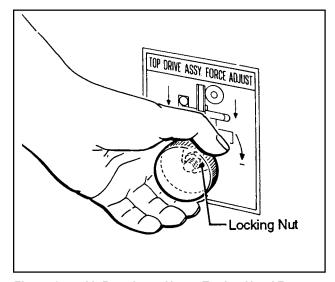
Air Regulator, Upper Taping Head Frame
